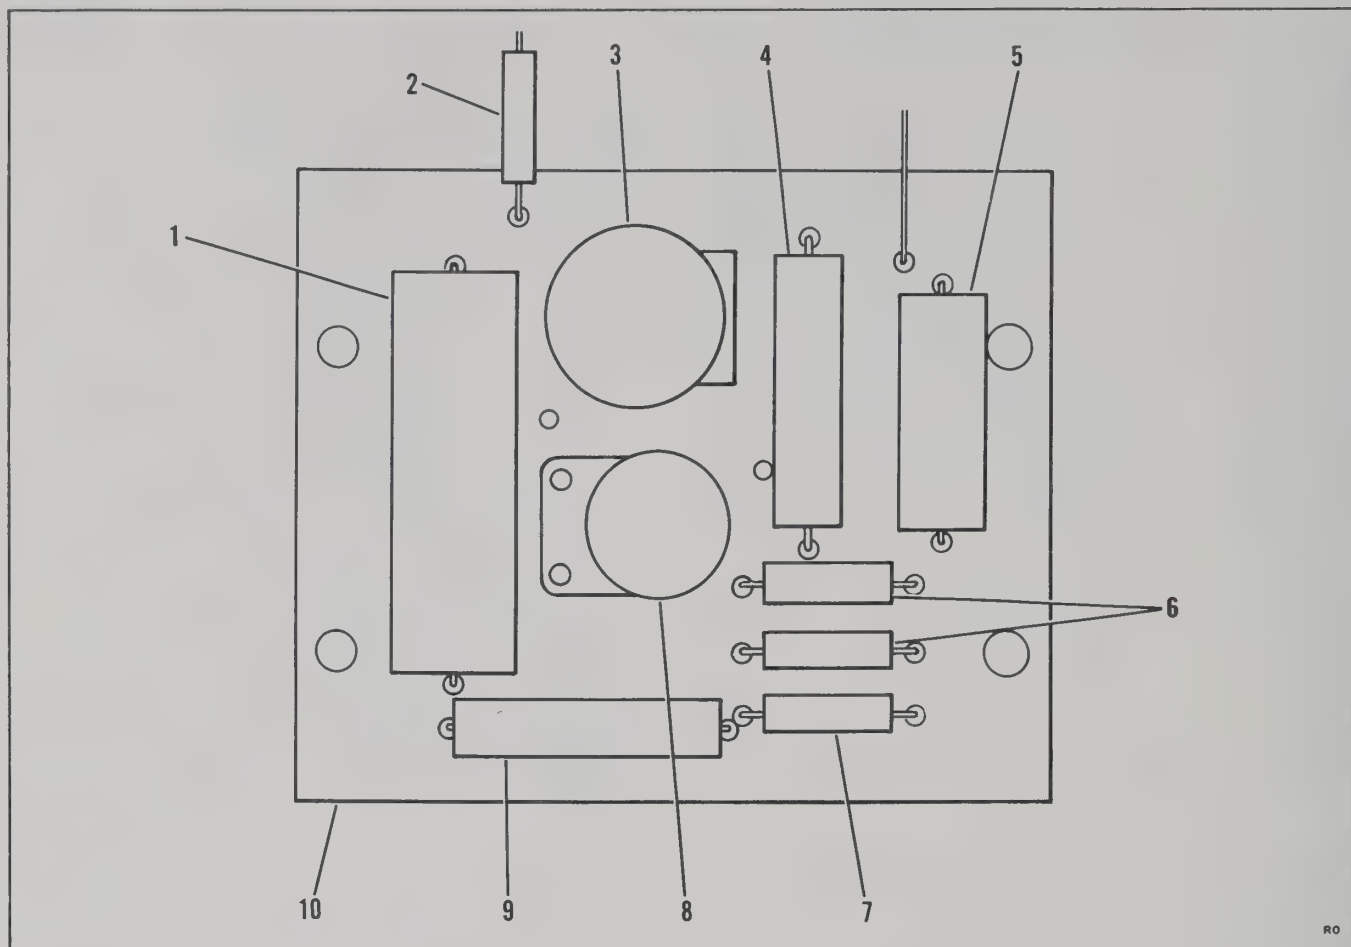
Printed Circuit Board Assembly, Part No. 400D-65C
